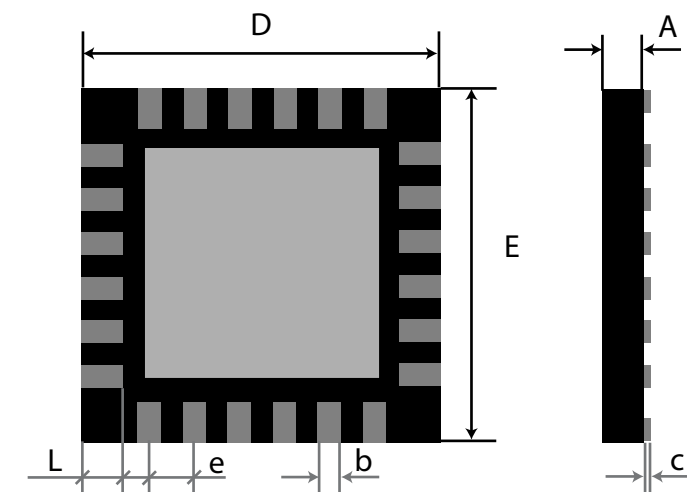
24-pin QFN Package Dimensions (viewed from bottom)
